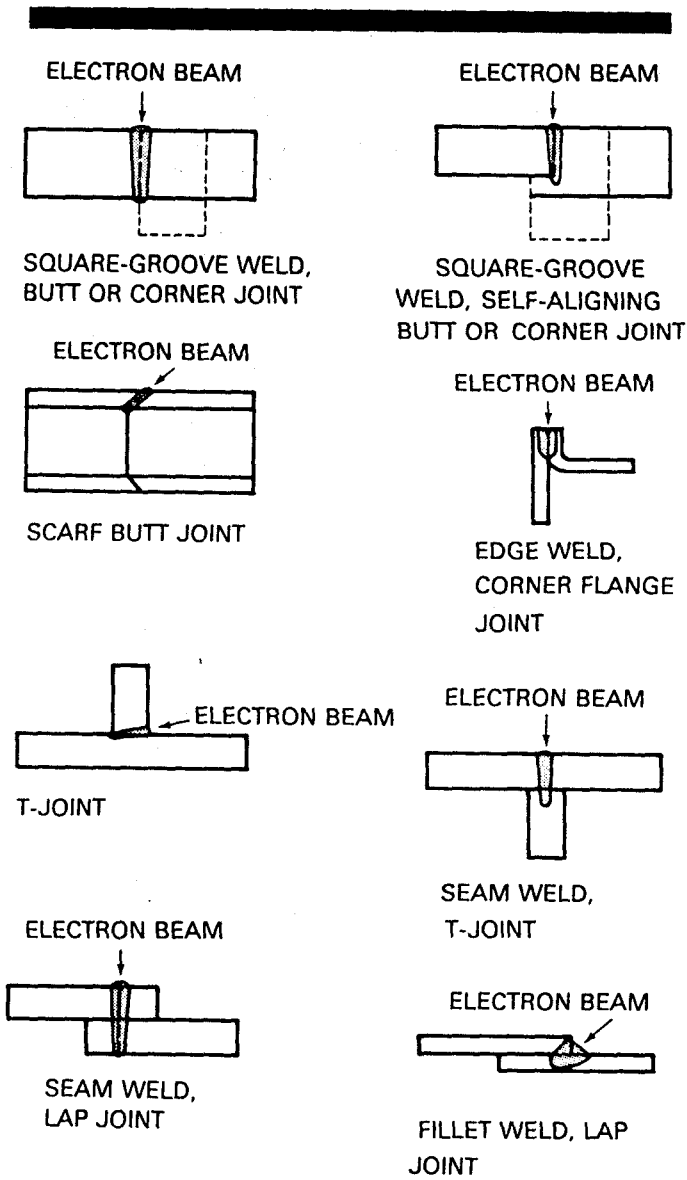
Typical Joint Designs for Electron Beam Welds
